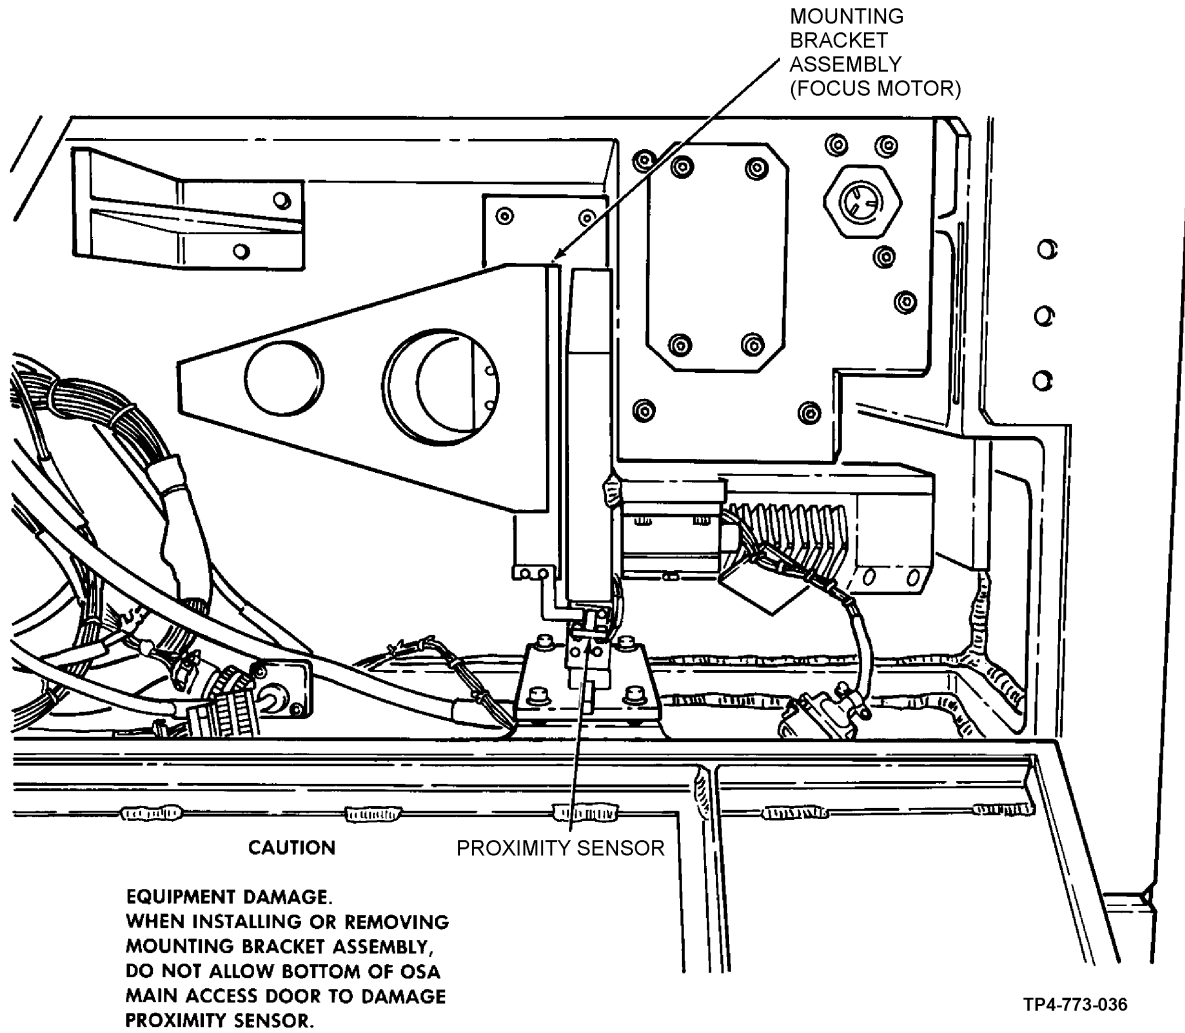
Mounting Bracket Assembly (Focus Motor) in Installed Position
